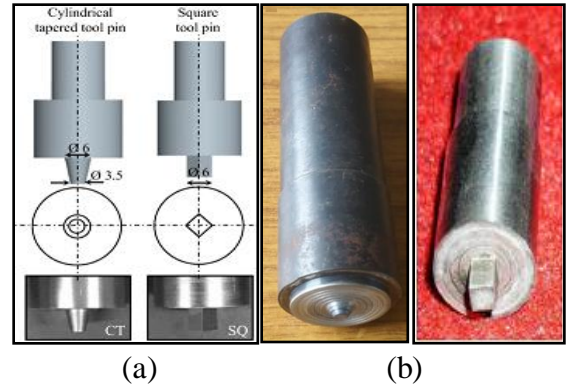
(a) Dimensions (b) Fabricated tools (Square and Taper pin profile)
